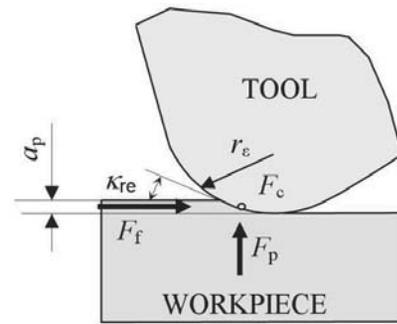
Schematic presentation of tool/workpiece contact geometry
